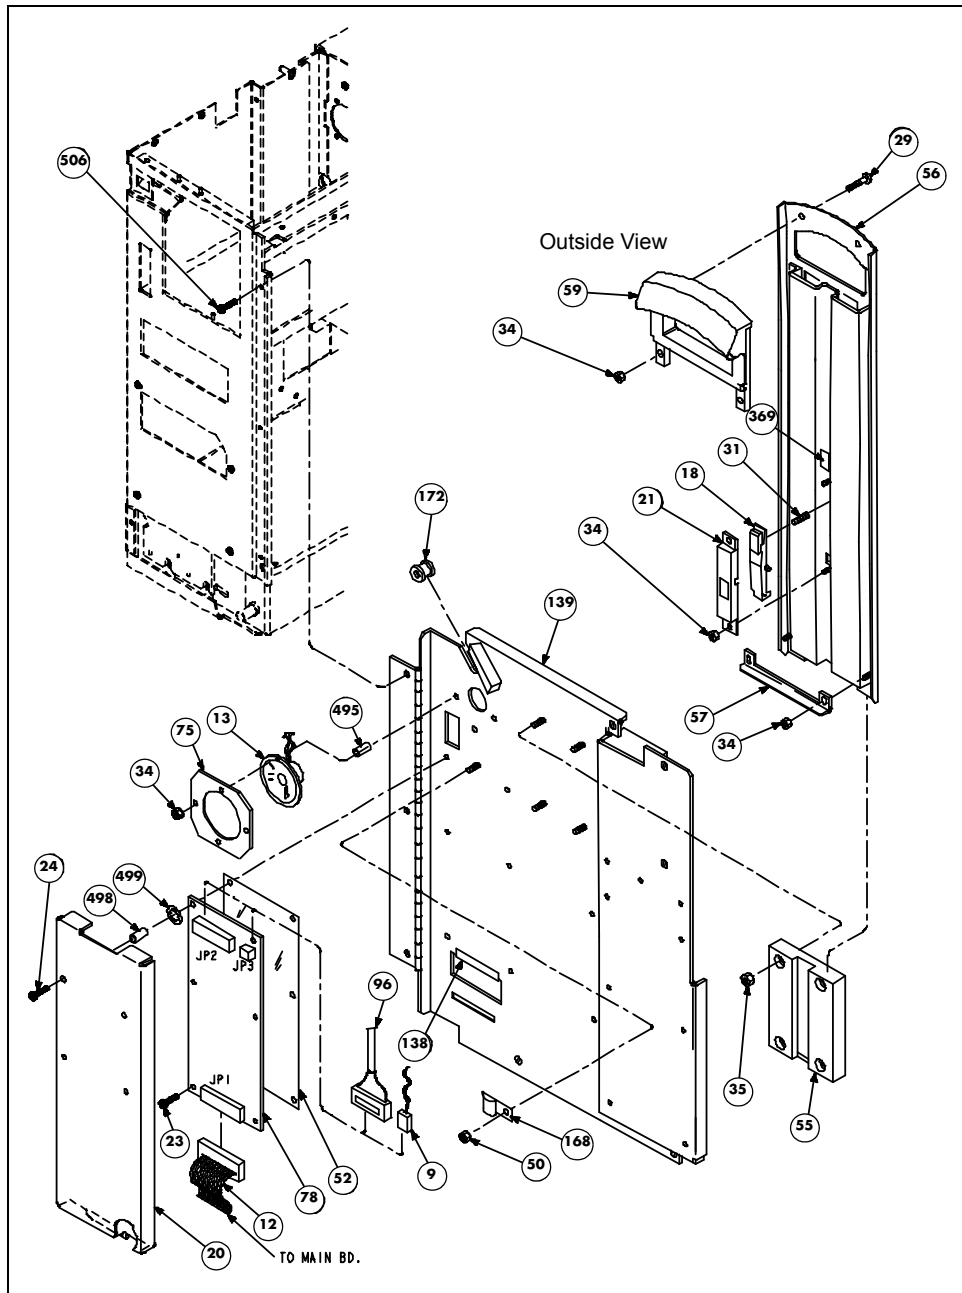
Isometric Drawing, Chassis, Left Door (Outside View)
